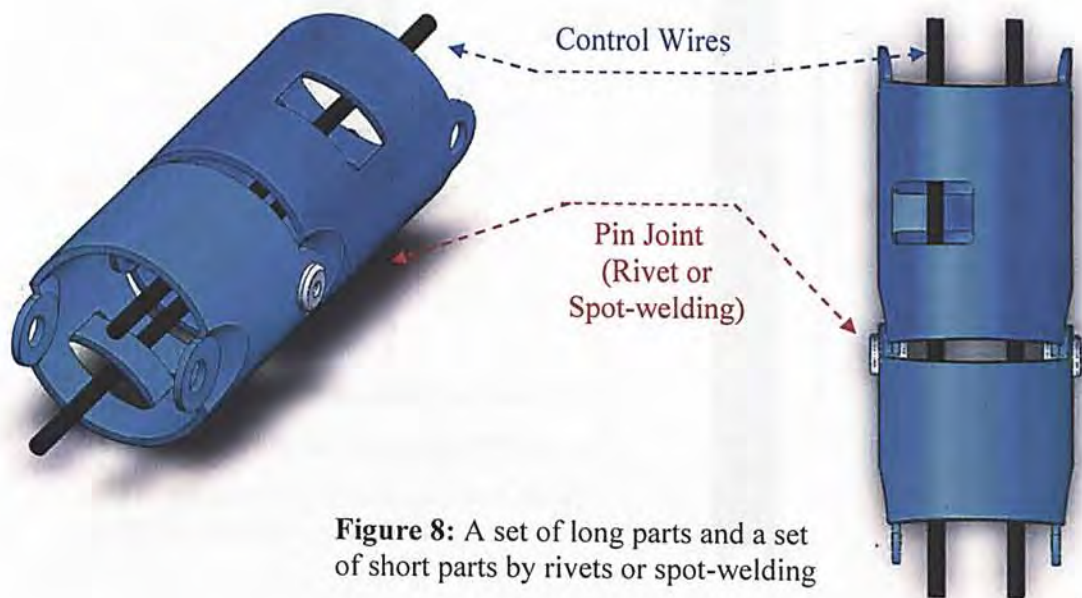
A set of long parts and a set of short parts by rivets or spot-welding
